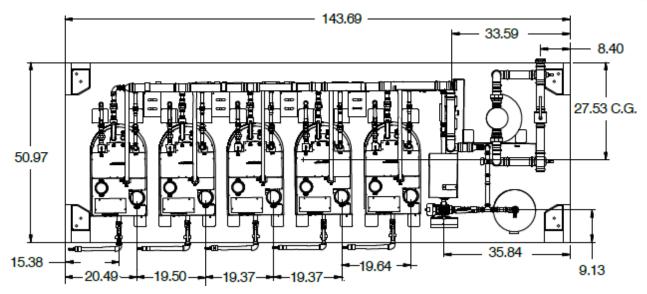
LC-N-1000-5 Dimensional Drawing – Overhead View
